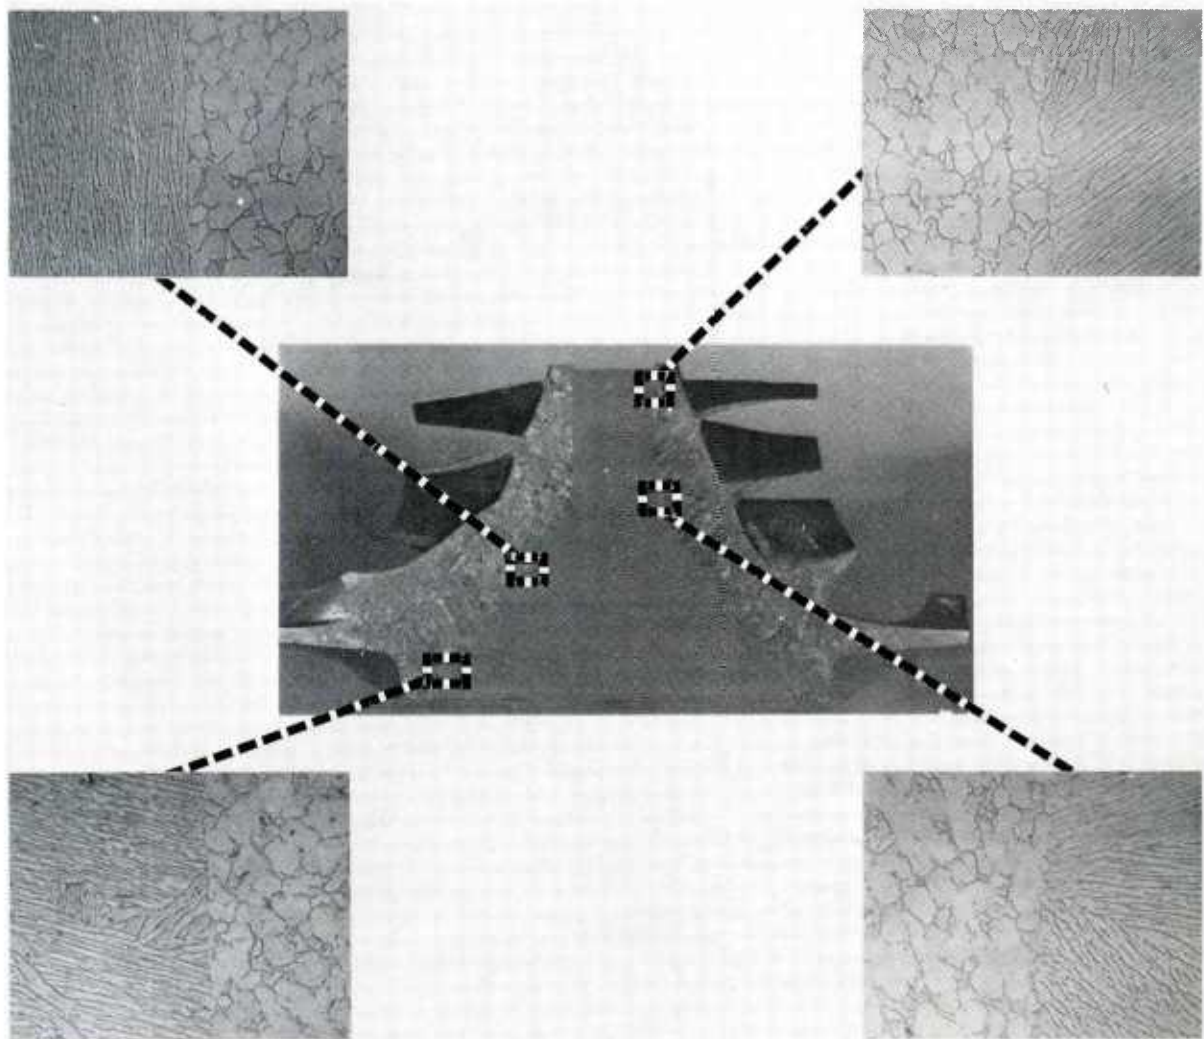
Bonded impeller cross section showing selected photomicrographs of the bond joint.
